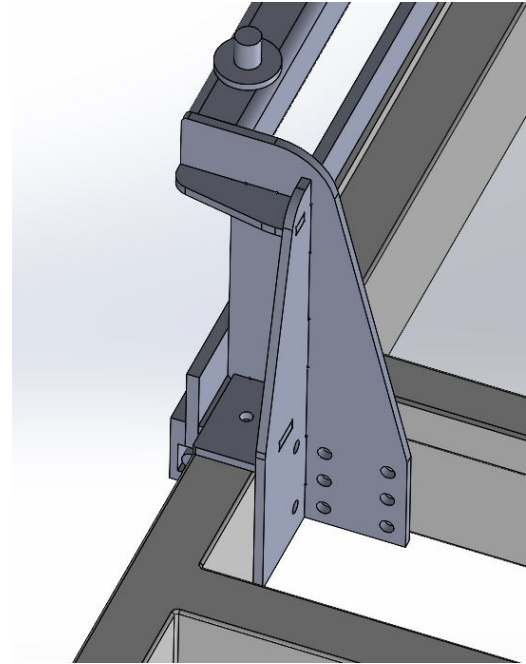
Backside mounting of the tensioner frame consisting out of multiple plates welded together to create stiffness in all directions
